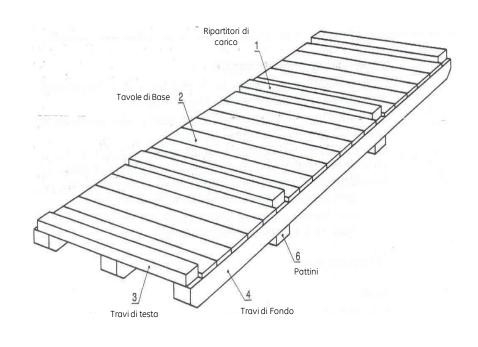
Base of wooden and plywood crates with support structure with transversal underbeams
